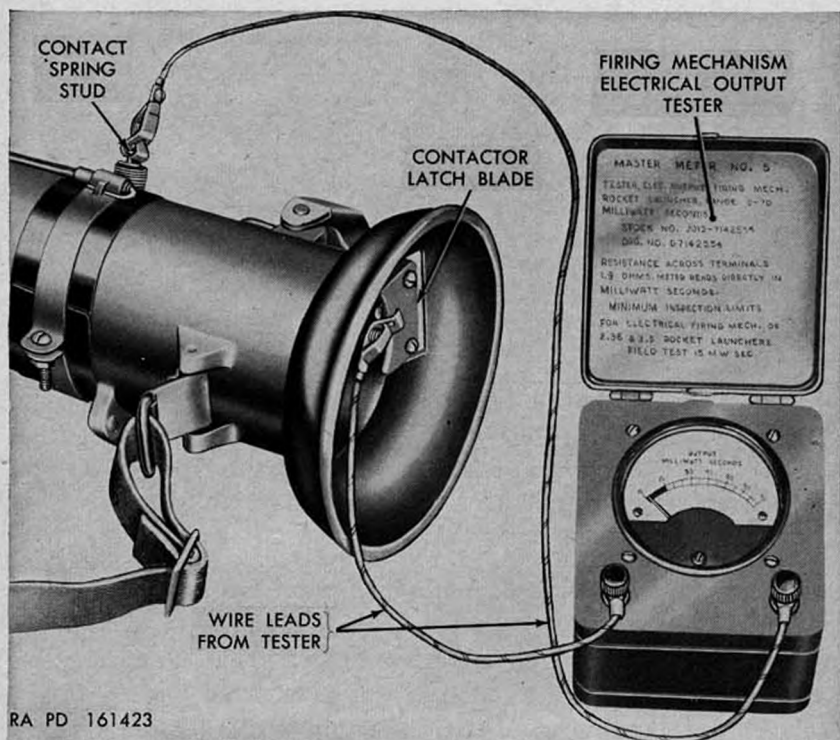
Testing electrical circuit of completely assembled rocket launcher.
